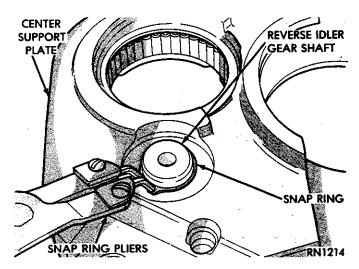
Removing/Installing Idler Shaft Snap Ring
